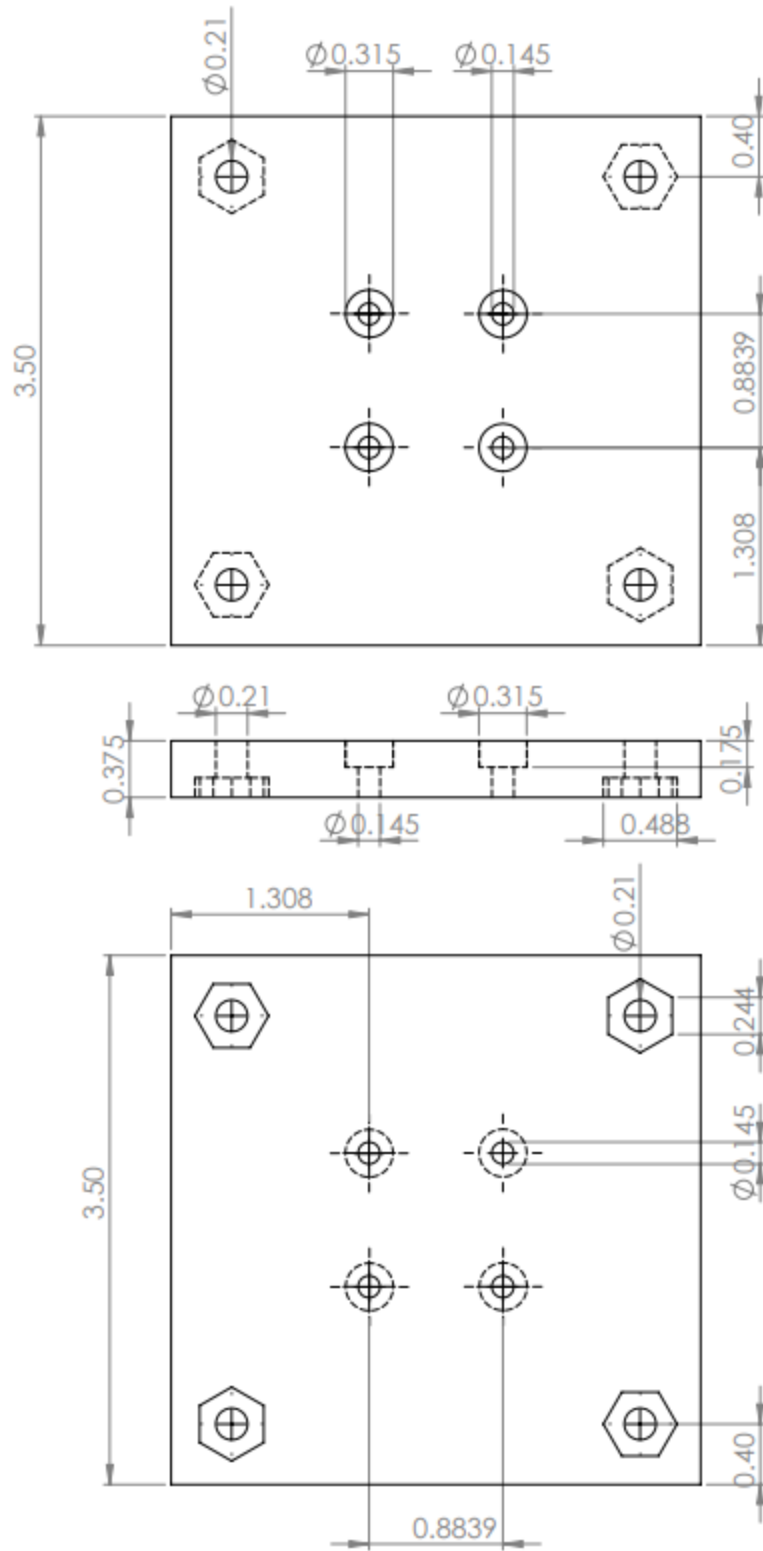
Sensor Mount 2 Engineering Drawing (IPS)
